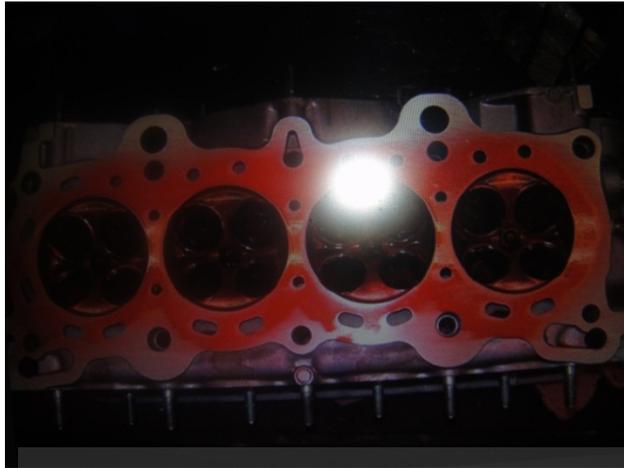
Cylinder head test showing bright red lines to aid in crack detection
